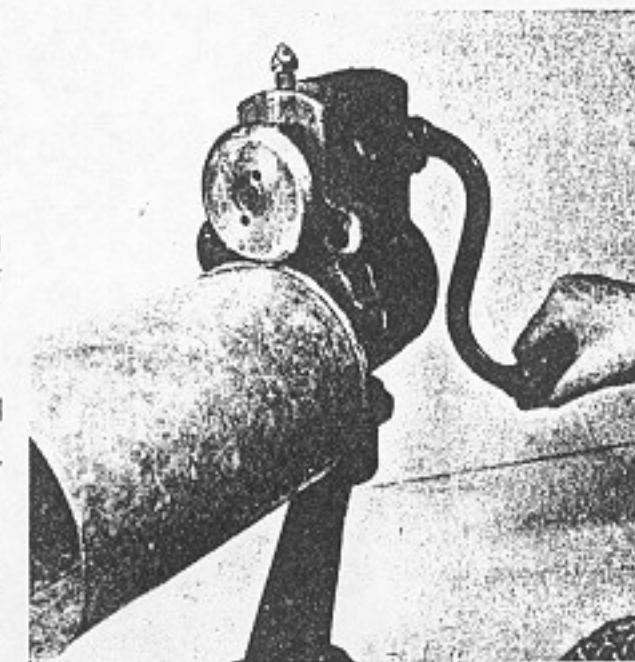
Wiring machines may be used to wire straight edges as well as circular edges.
